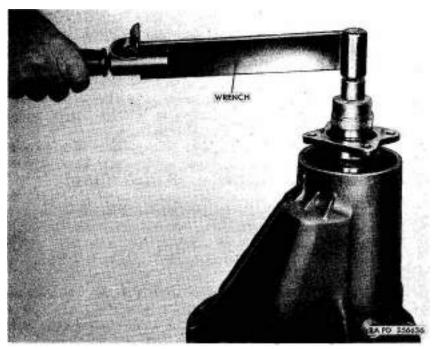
Checking drive pinion bearing preload with torque indicating wrench.
